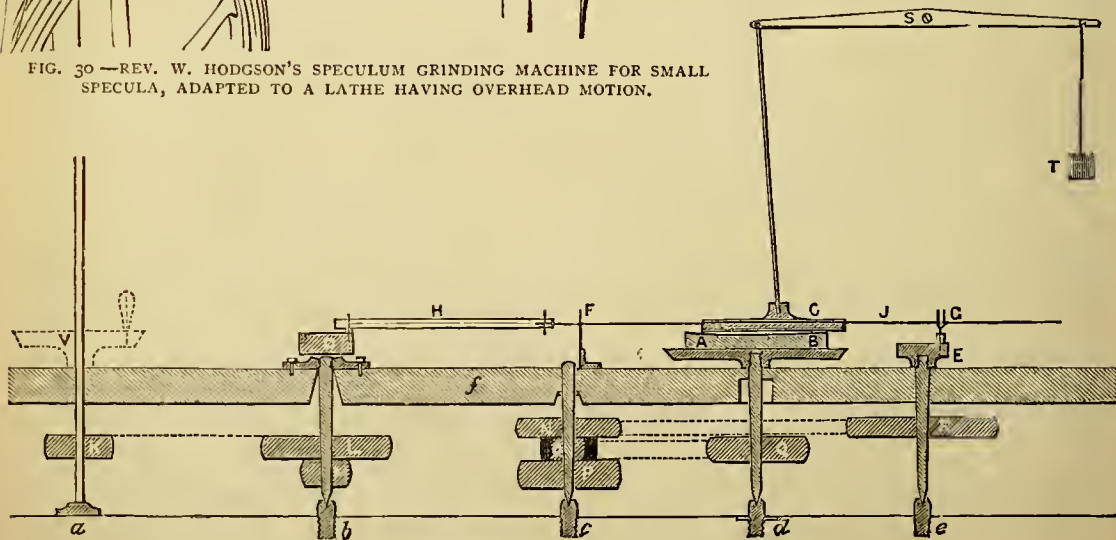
LORD ROSSE'S STRAIGHT-STROKE MACHINE—SECTION.
